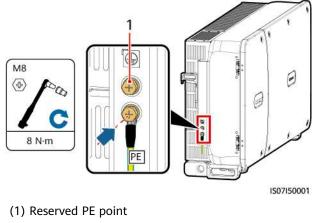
Connecting the PE cable to the PE point (on the enclosure shell)
